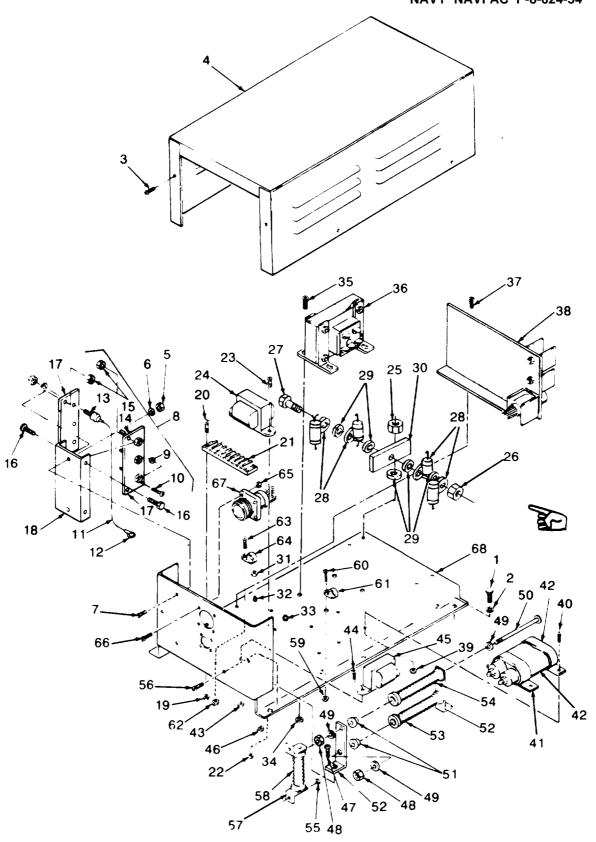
Static Exciter and Voltage Regulator Assembly, Exploded View (Sheet 1-3)
